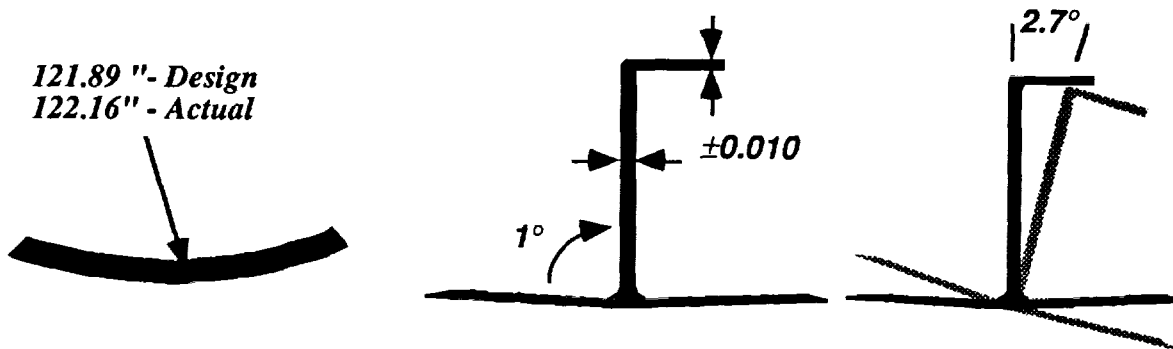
Tolerance Control of the 3 ft. Frames
